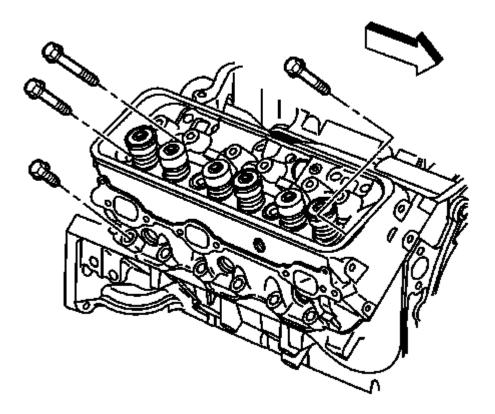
Locating Cylinder Head Bolts (Right) Courtesy of GENERAL MOTORS CORP.
